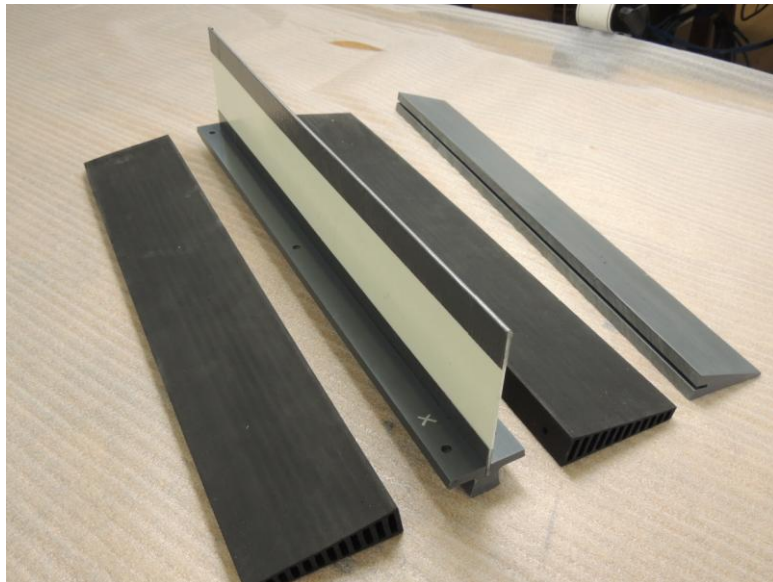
The two flap parts with voids were extruded whereas the other two parts were machined and glued together.
